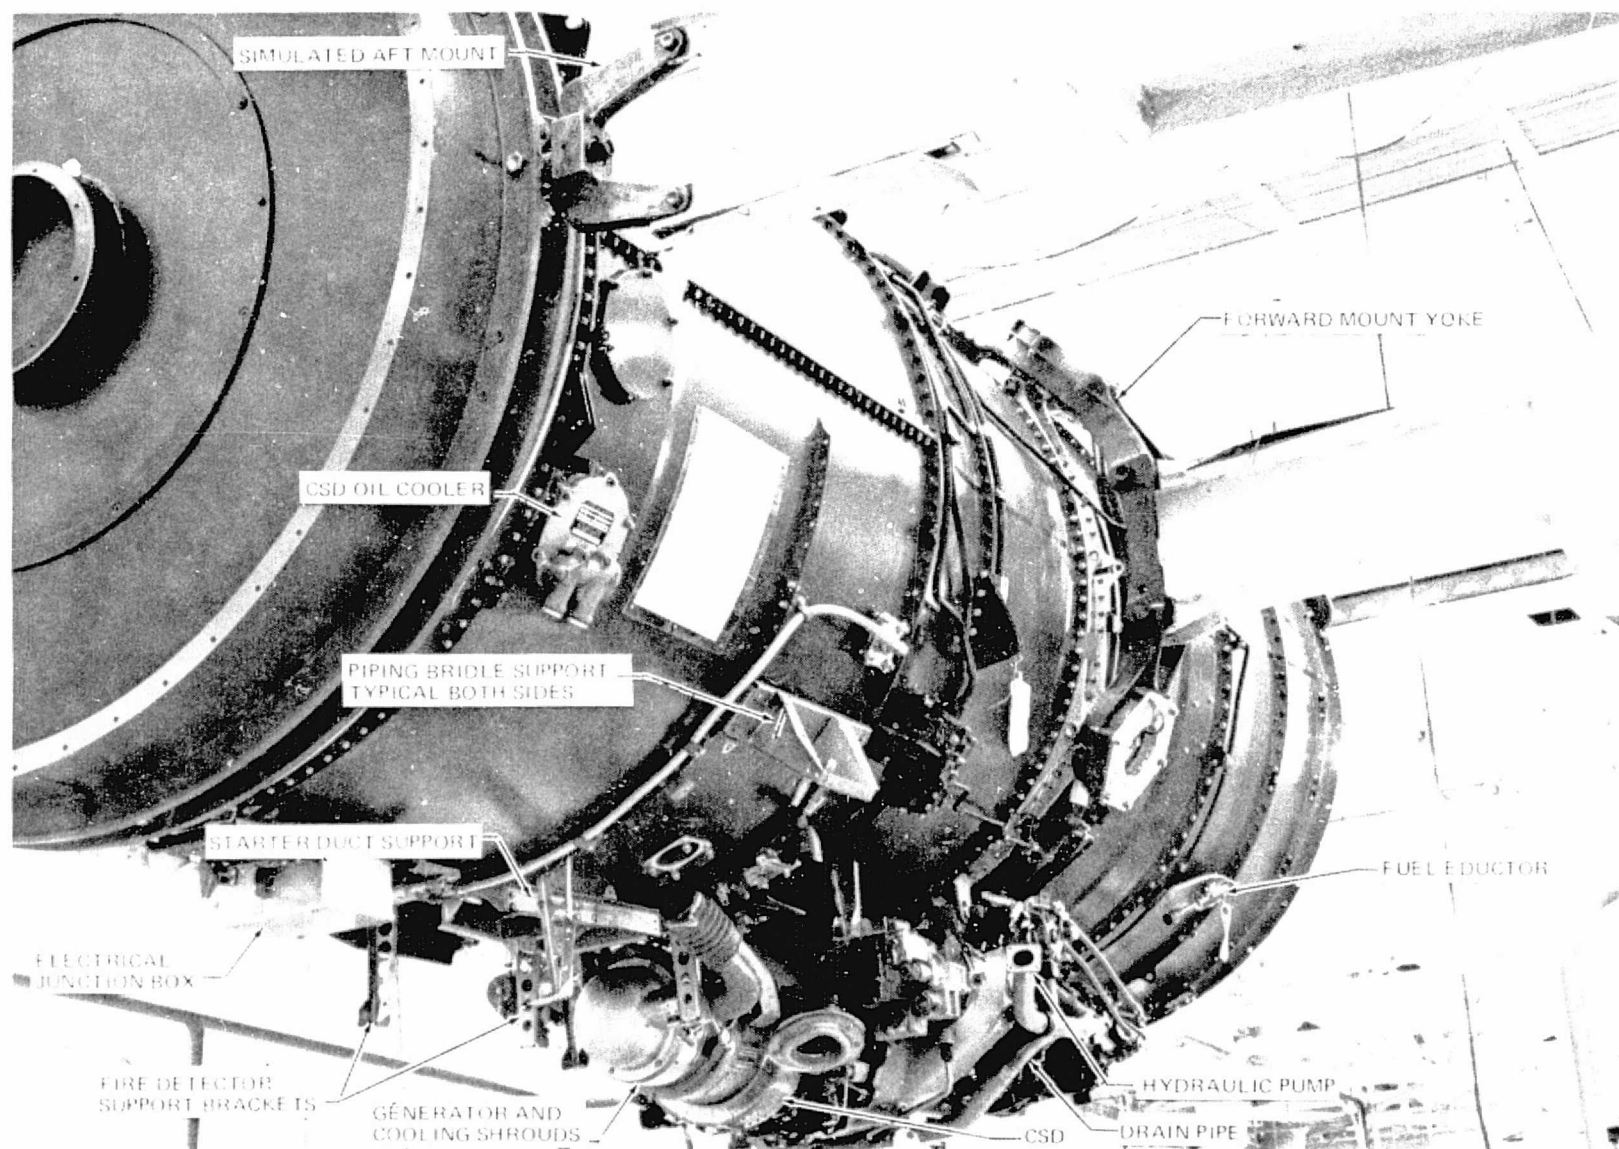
RIGHT SIDE - MOCKUP ENGINE AND MOUNTING FIXTURE
